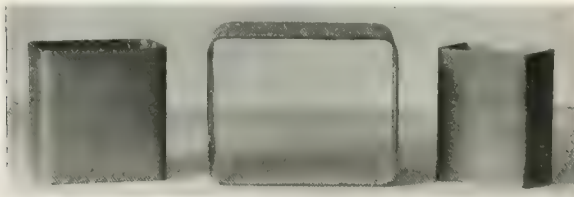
MACHINE FORMED INSULATING BARRIERS SUCH AS USED IN FIG. 8
